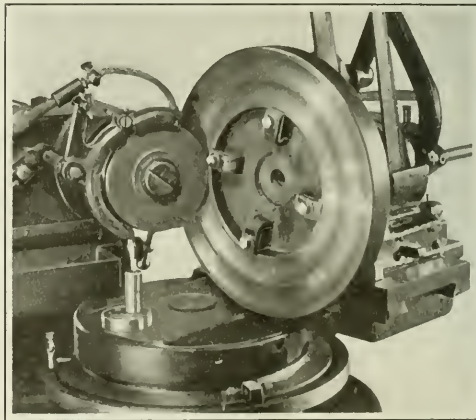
Grinding a Double-row End-thrust Ball-bearing Plate on a Radius Grinder
